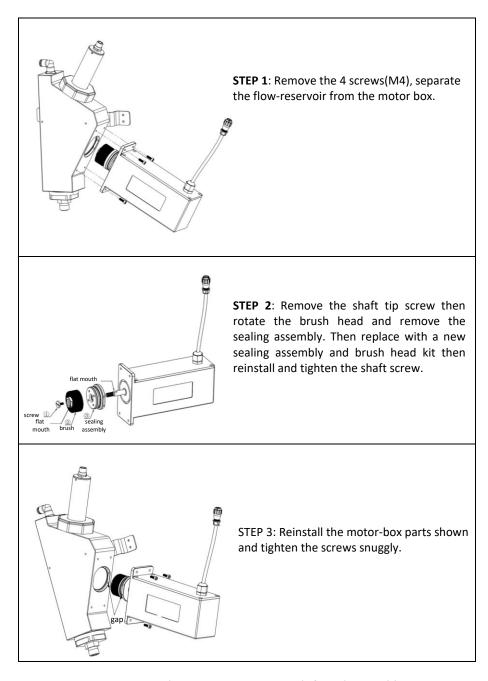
Replacing FT-100-PLUS Brush & Seal Assembly
